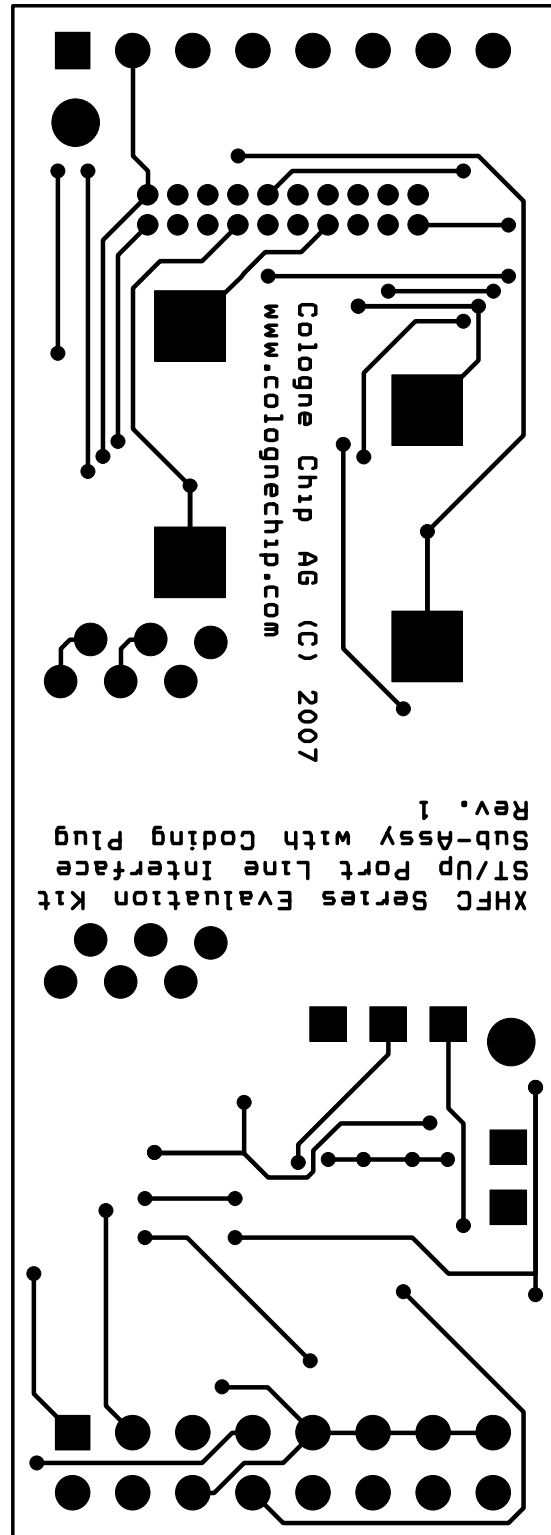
S/T Port Line Interface Subassembly with Coding Plug board (bottom side traces)
